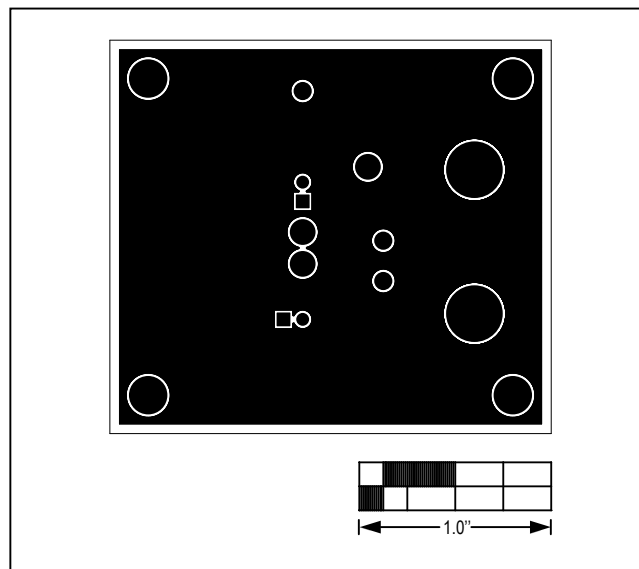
MAX14653–MAX14655 EV Kit PCB Layout—Solder Side
